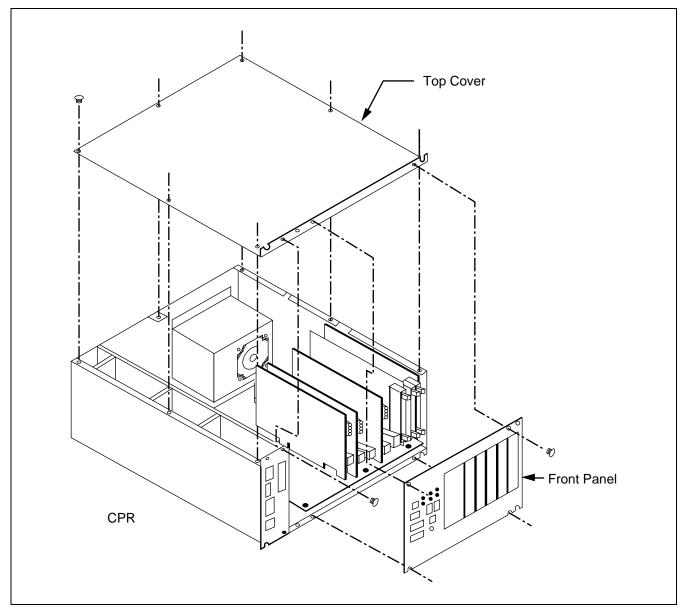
Reattachment of CPR Top Cover and Front Panel
